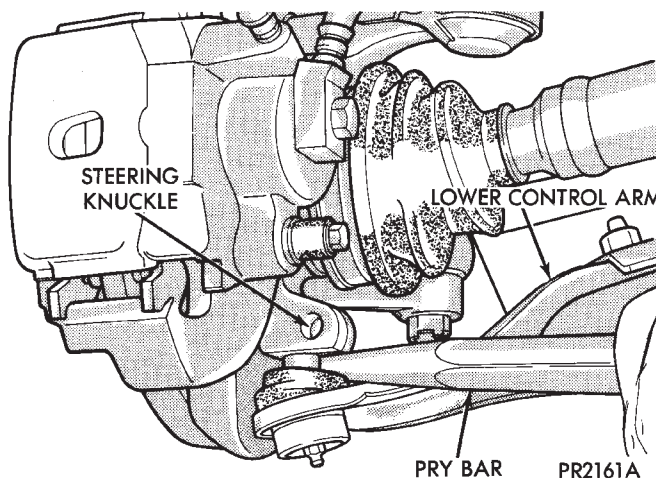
Remove Ball Joint to Steering Knuckle Clamp Bolt
